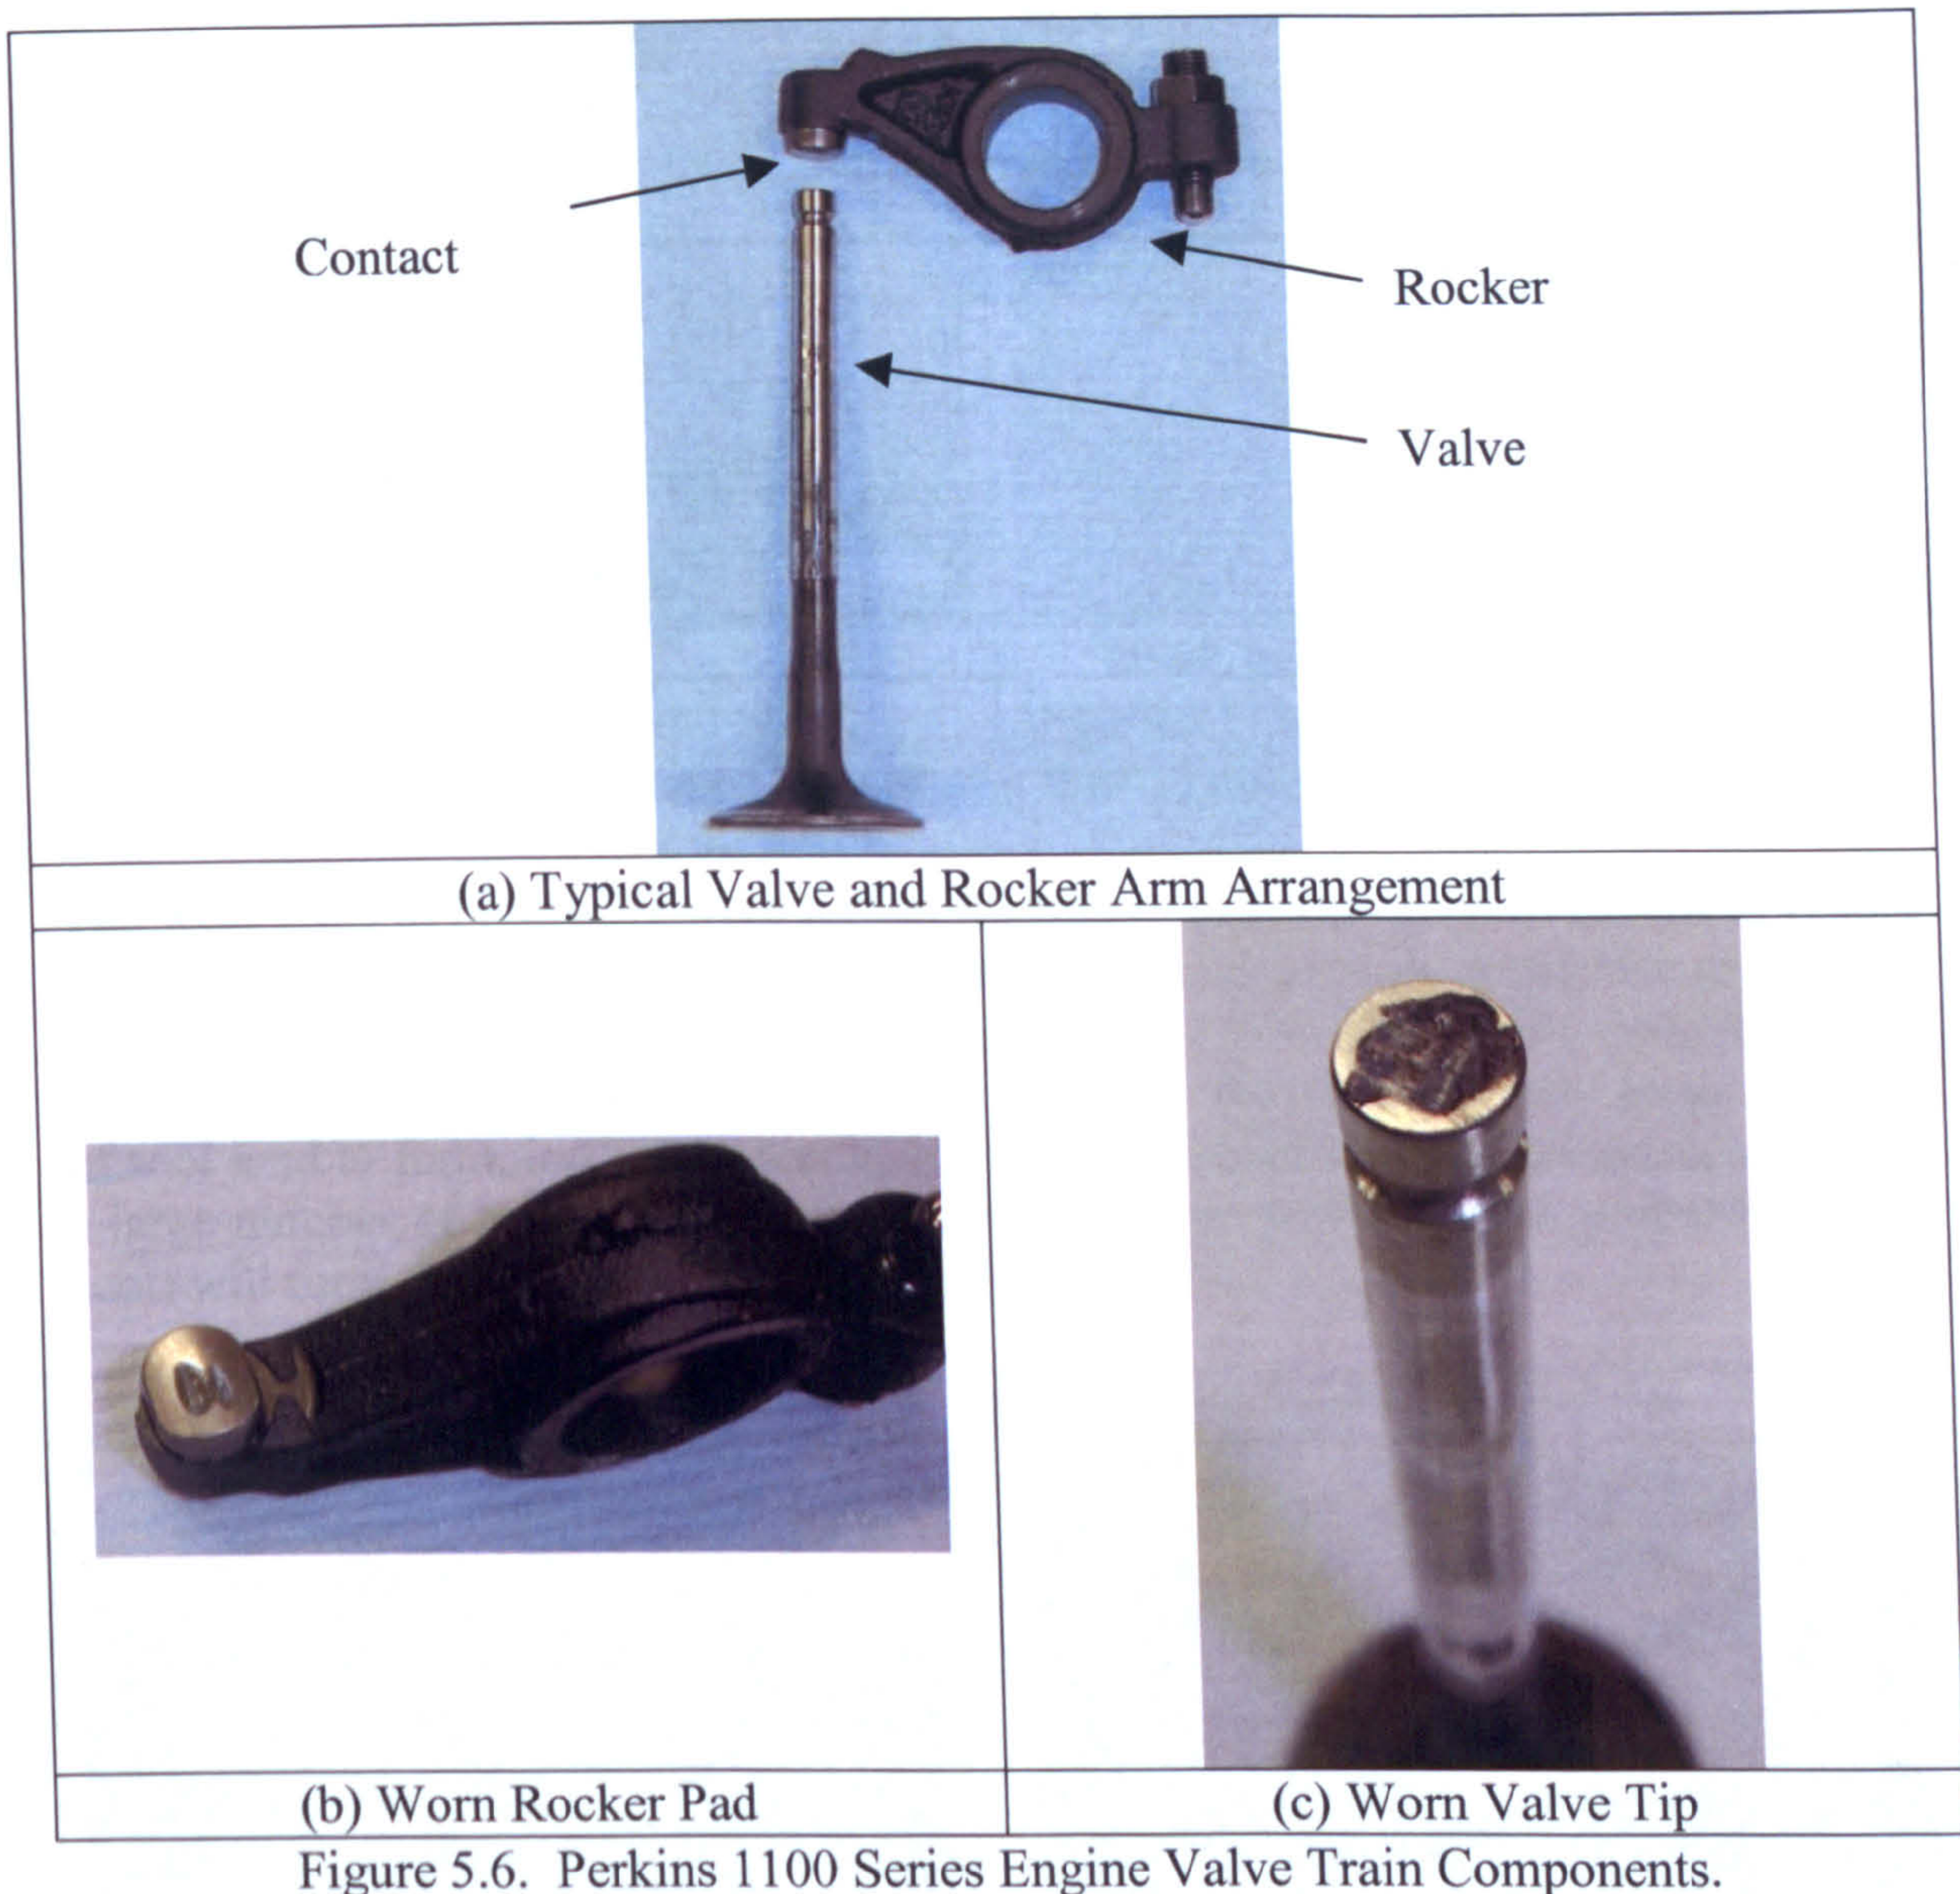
Perkins 1100 Series Engine Valve Train Components.
